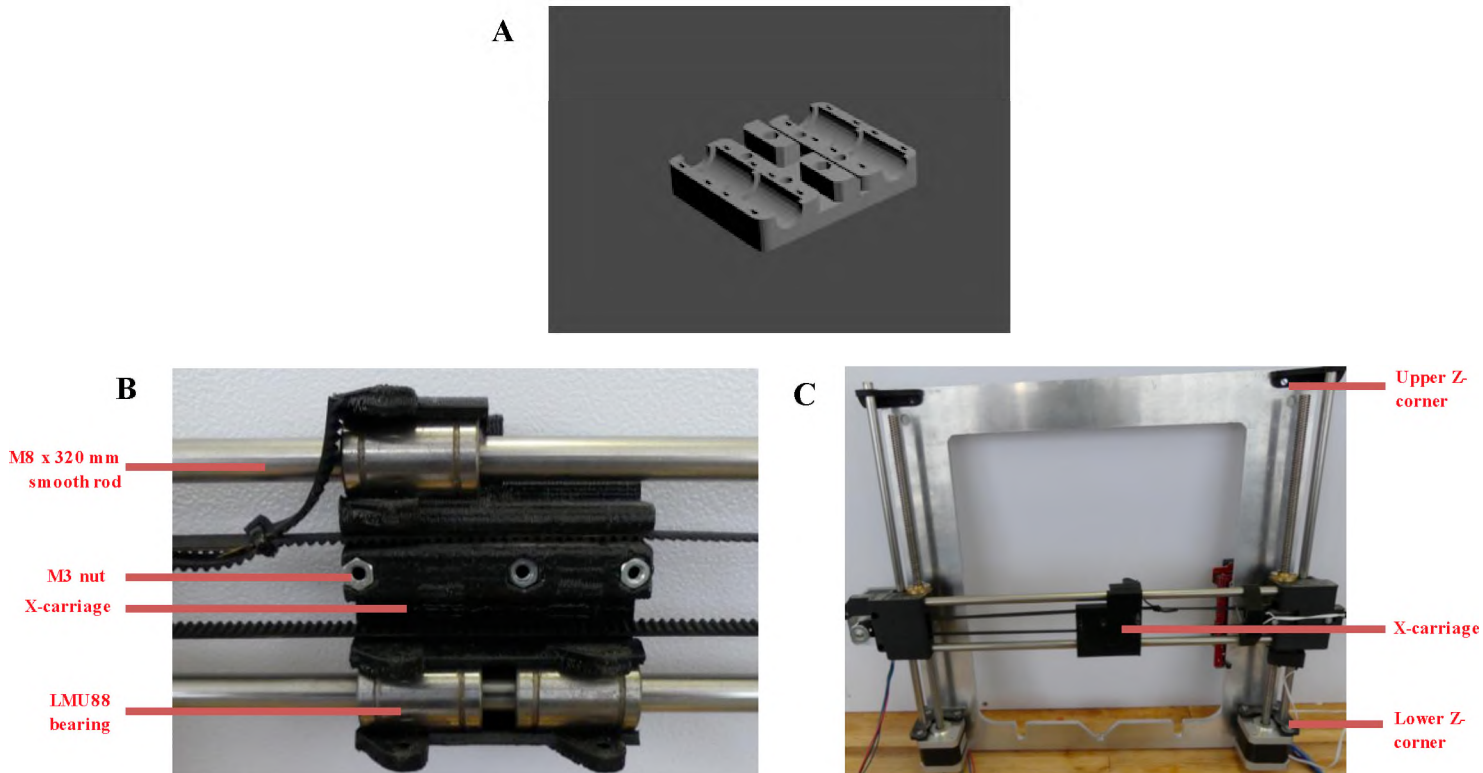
XZ-frame. A: Printed X-carriage. B: Assembled X-carriage. C: Fully assembled XZ frame.
